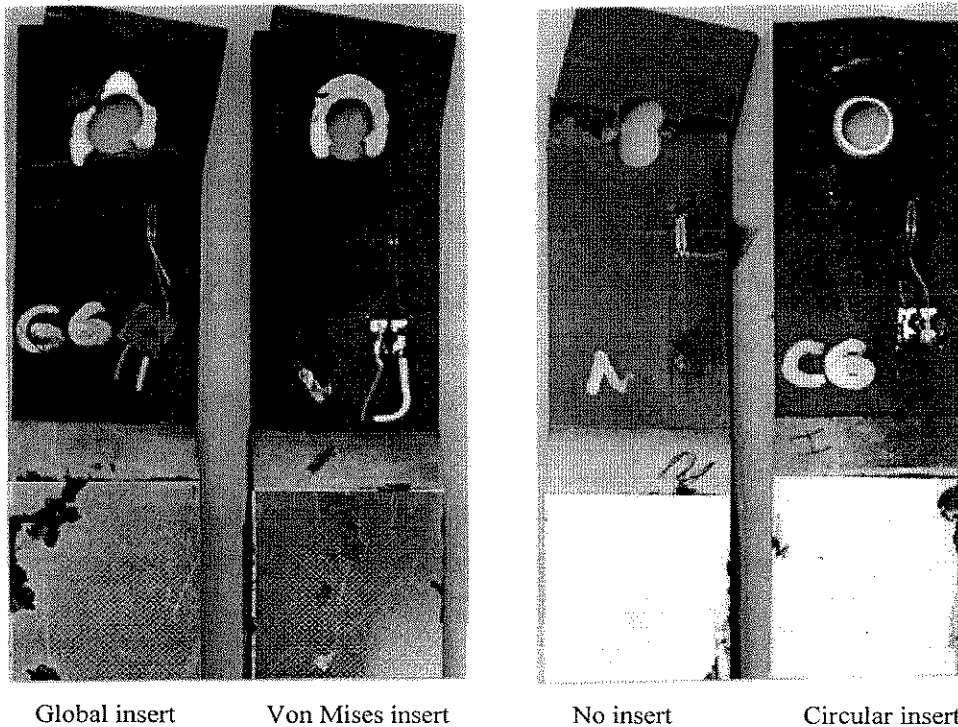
Typical failed test specimen for all joint configurations (finger tight)
